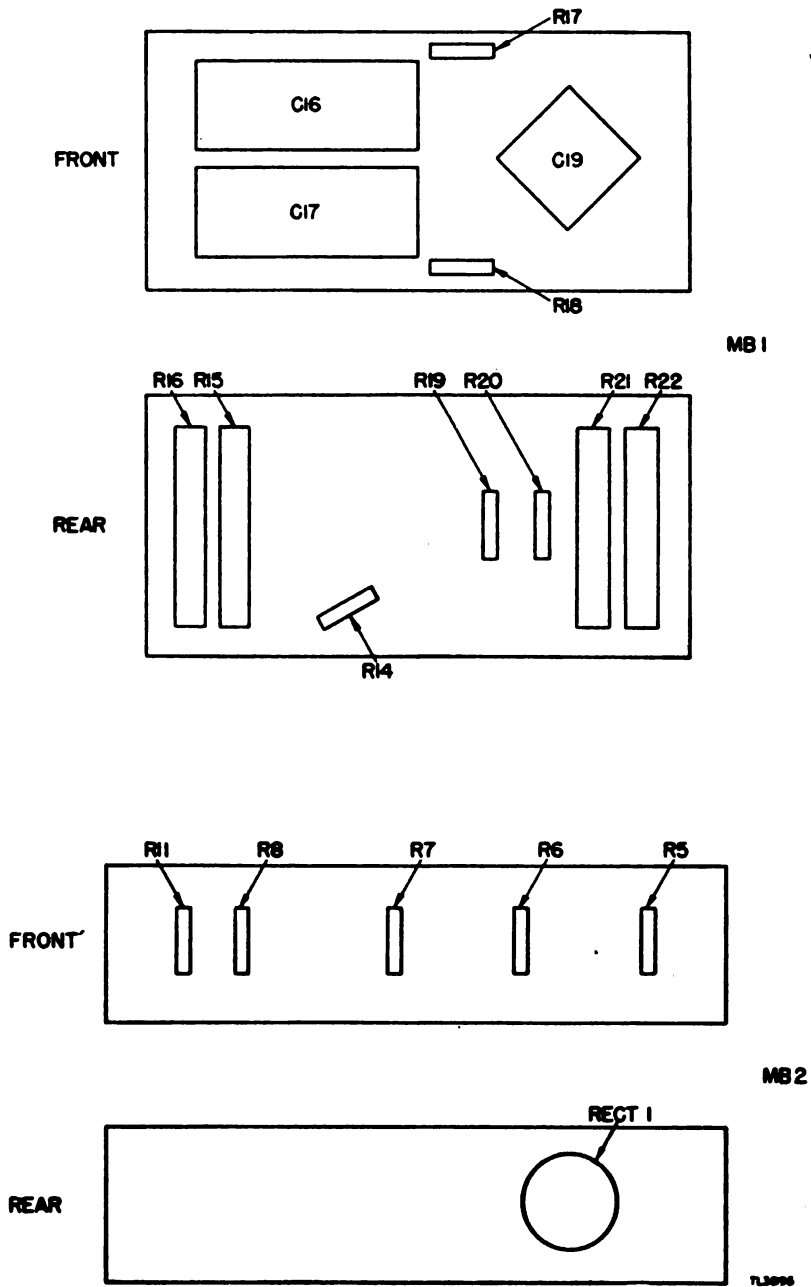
Aural Signal Unit 0-8/MPN-1, mounting boards.
